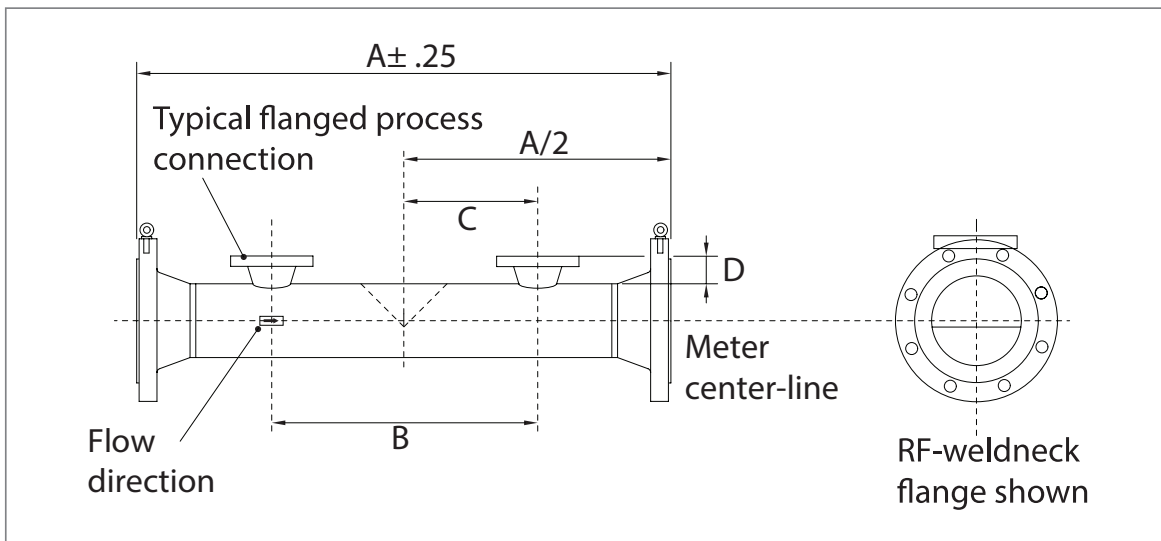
Tek-DP 1670A With Flanged Tappings and RFWN End Flanges (4" to 24")
